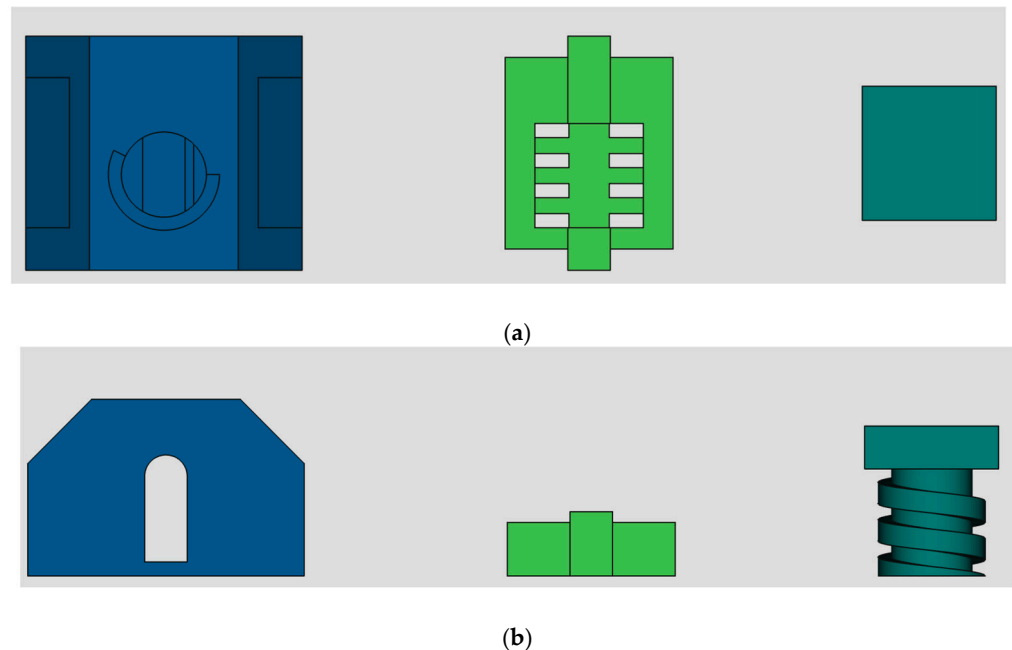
FreeCAD view of the enclosure (left), component housing (center), and securing bolt (right); (a) top view; (b) rear view.
